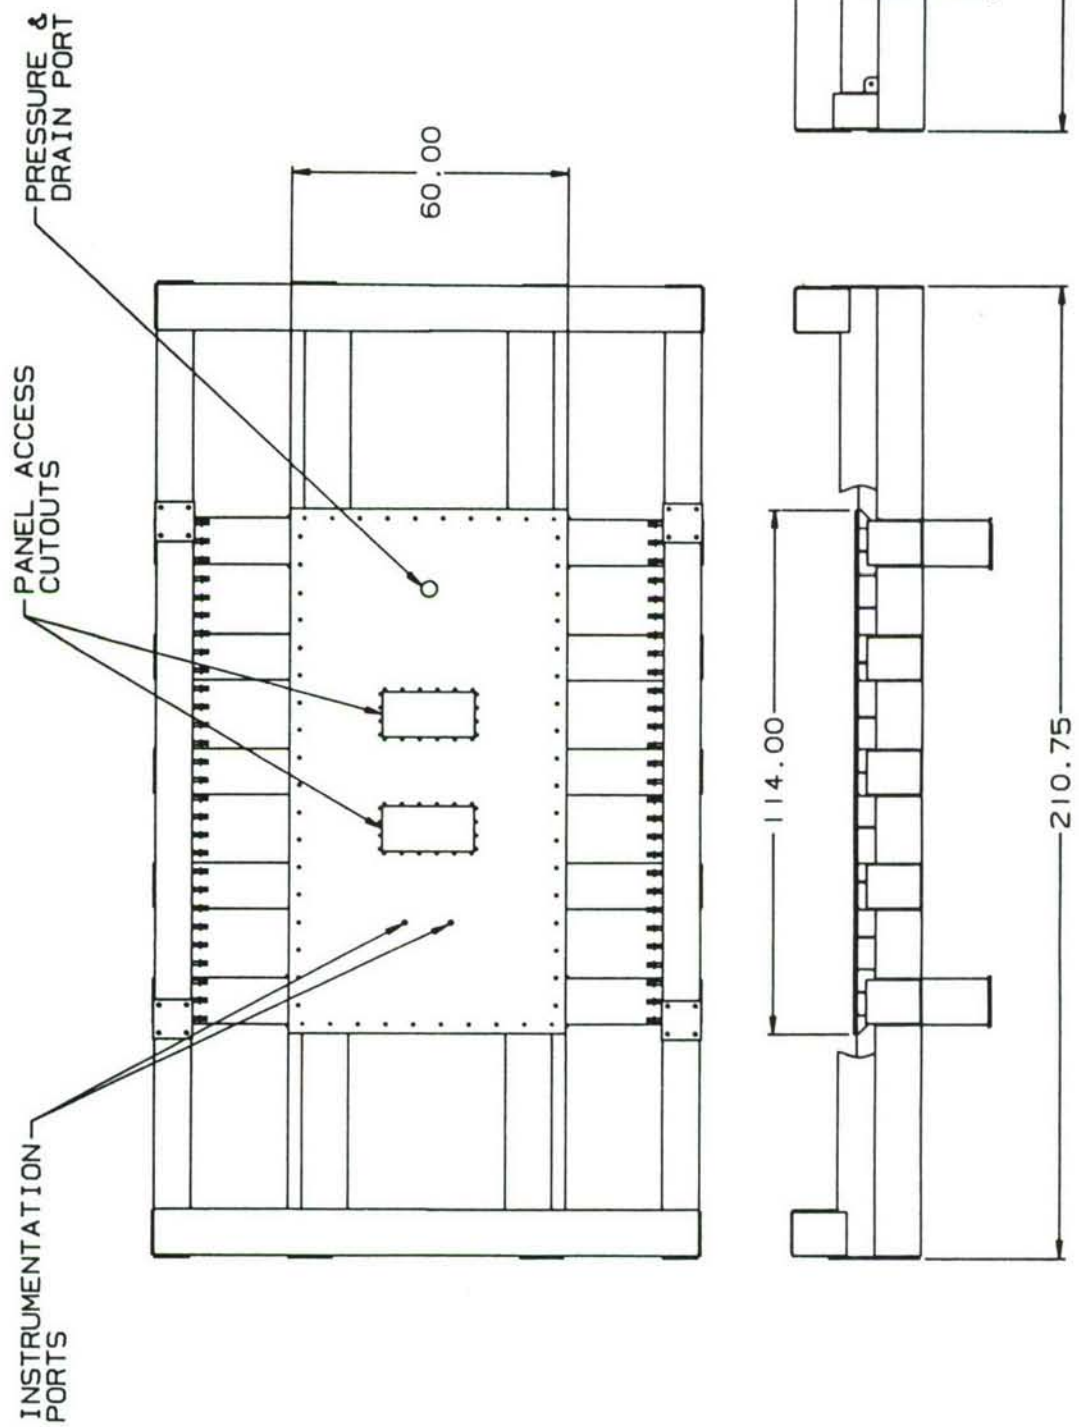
CURVED PANEL TEST FIXTURE SCHEMATIC
